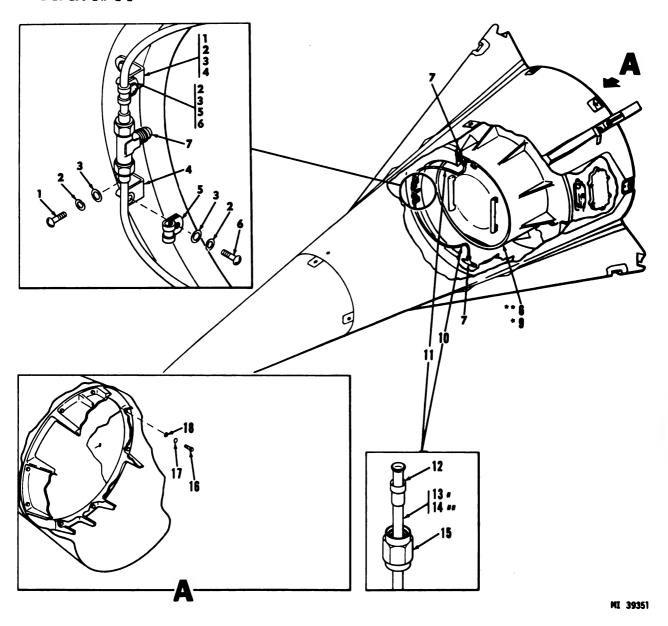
SECTION ASSEMBLY, NOSE /8530476/ /SEE FIGURE 34 FOR NEXT HIGHER ASSEMBLY/
